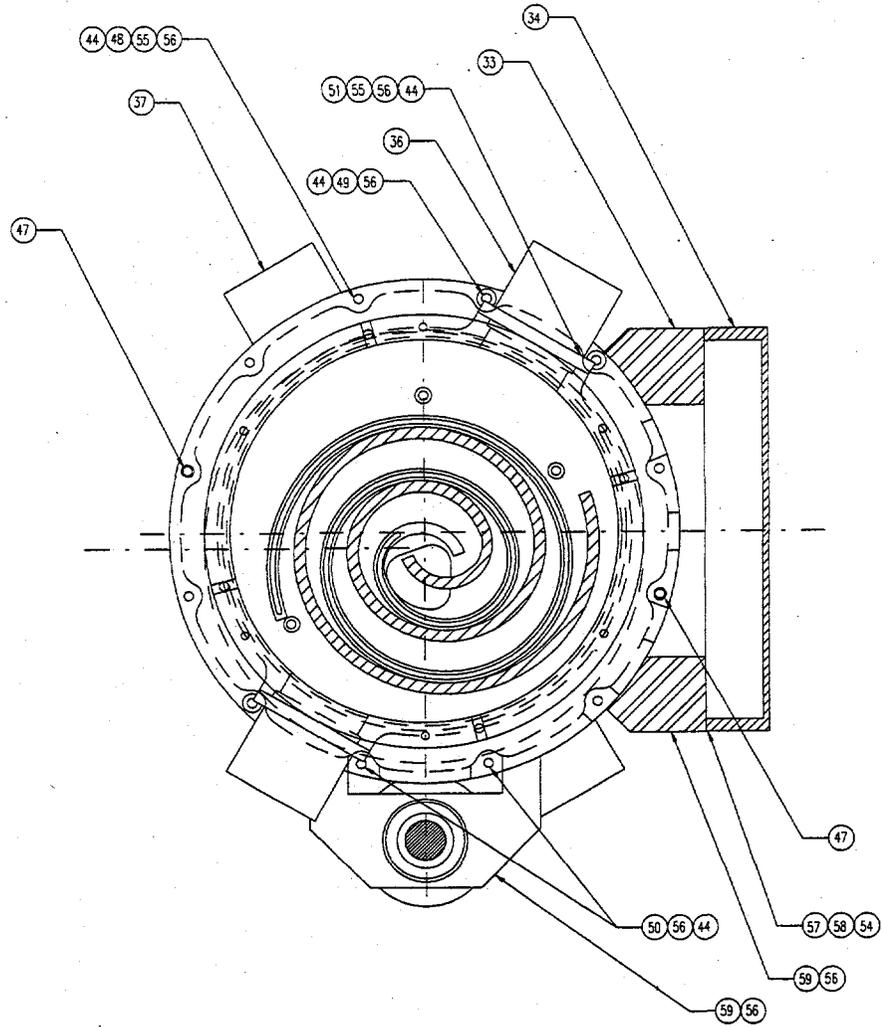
Integrated Scroll CEM Assembly- Side View
